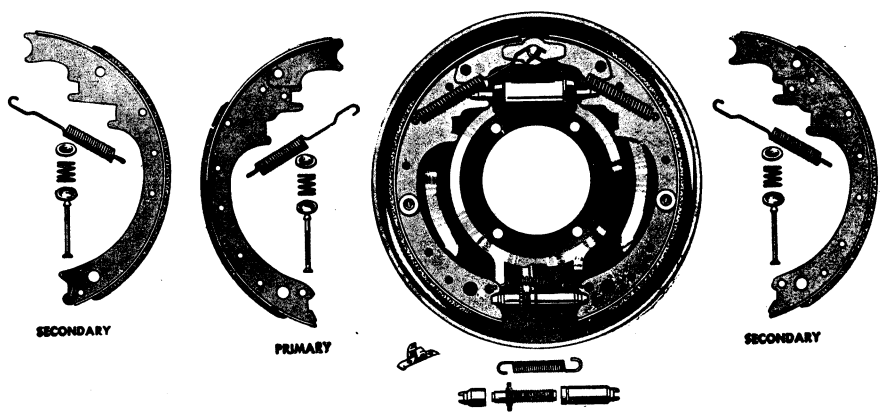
Bendix Duo-Servo brake with dual piston wheel cylinder
